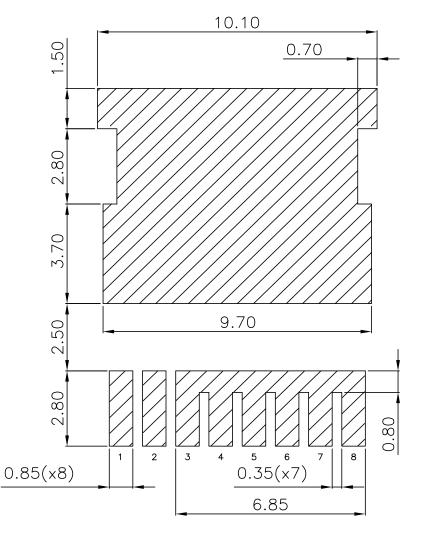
TO-LL type A2 recommended footprint (dimensions are in mm)
